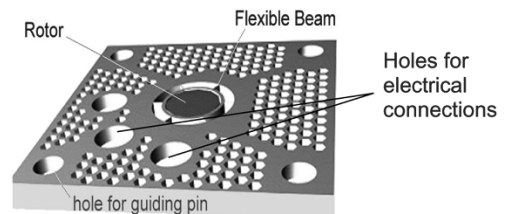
A 3-D rendering of a tethered rotor die. This ultrathick die was fabricated out of released SU-8 with a 500- μm -thick Ni-Fe core, bearing an 8- μm aluminum layer on the bottom, facing the stator.
